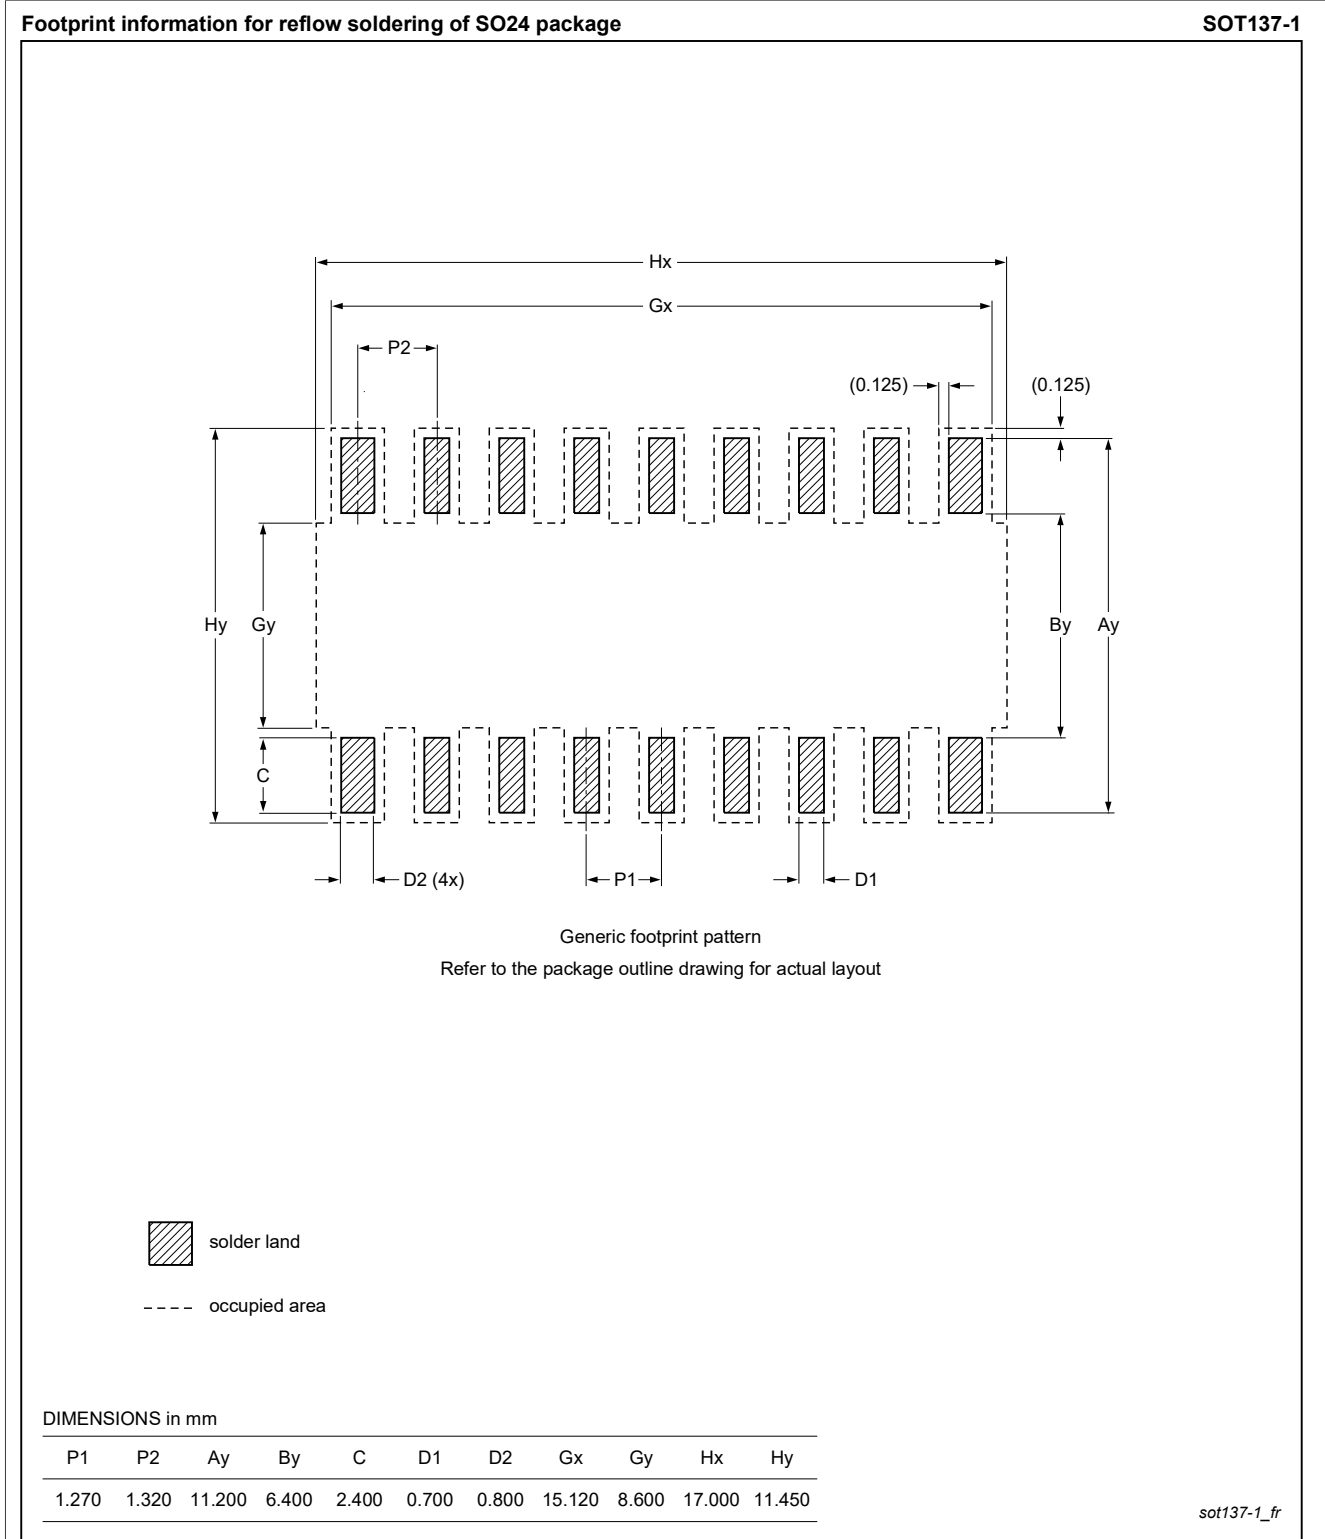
PCB footprint for SOT137-1 (SO24); reflow soldering
